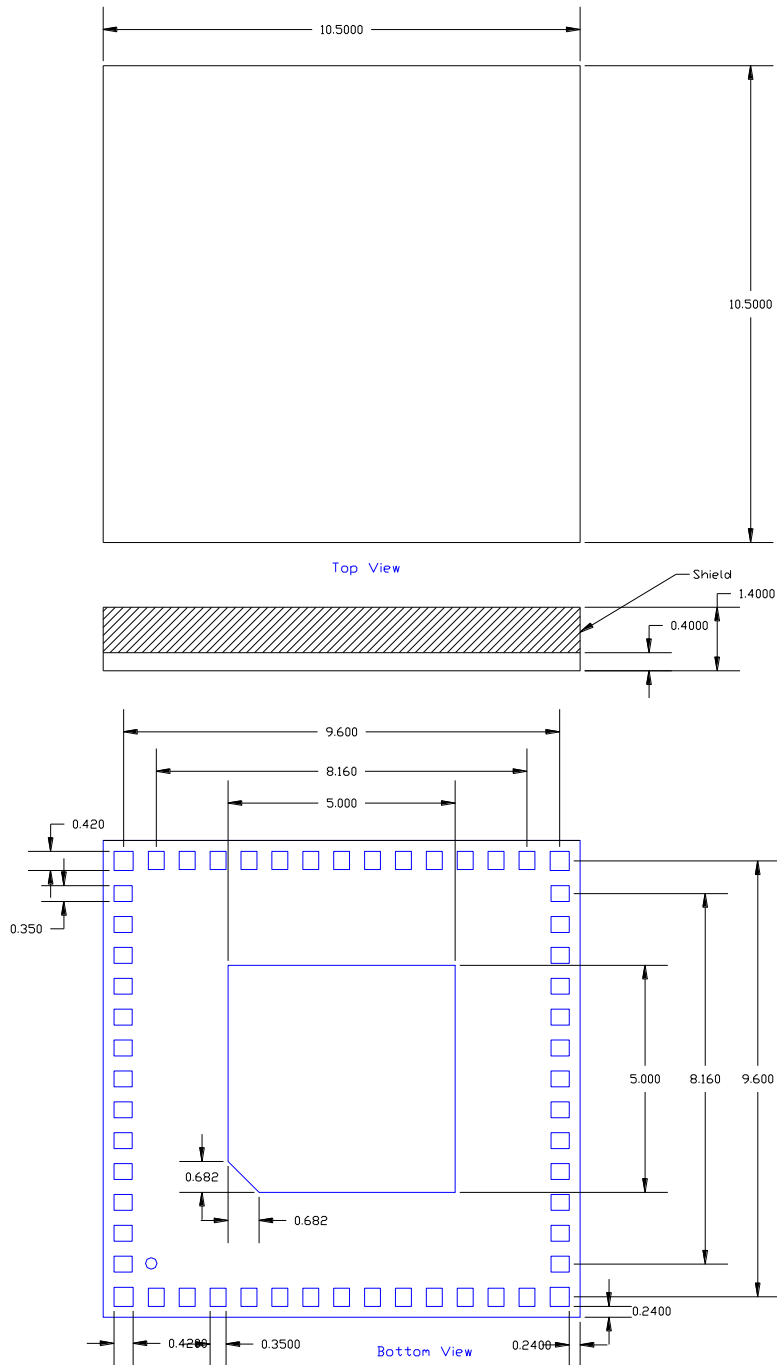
Module Mechanical Dimensions (Maximum Module Height = 1.40mm)
